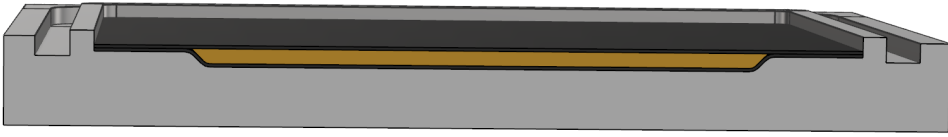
3D sketch of the lower tooling half with slot for core material. The upper and lower carbon fibre skin is here placed. The core is in between.
